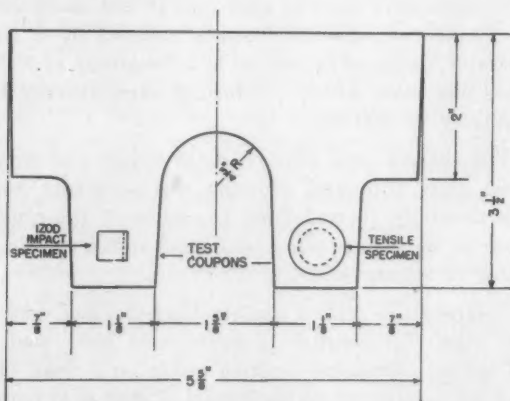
CROSS-SECTION OF KEEL TEST BLOCK.
